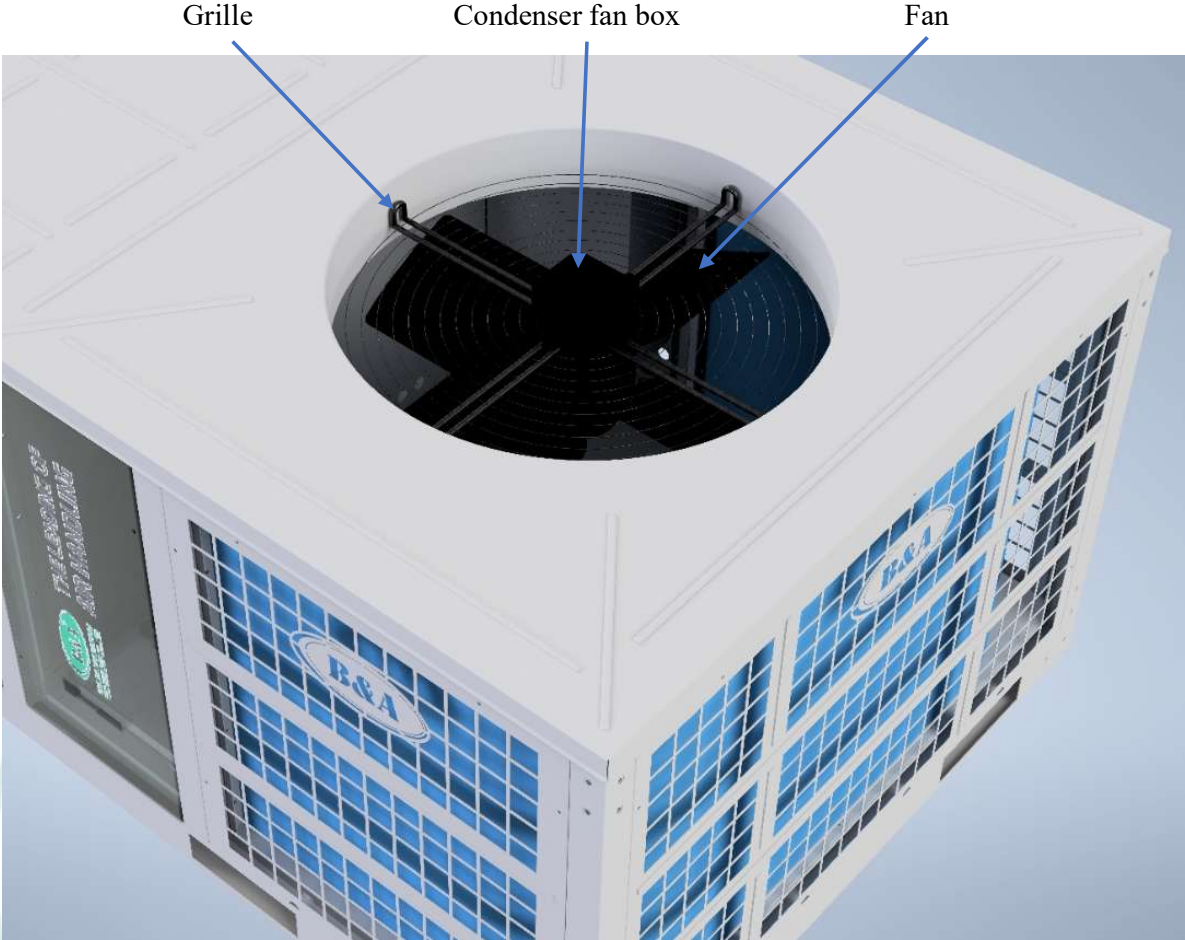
Condenser Fan Assembly of 5 ton unit
